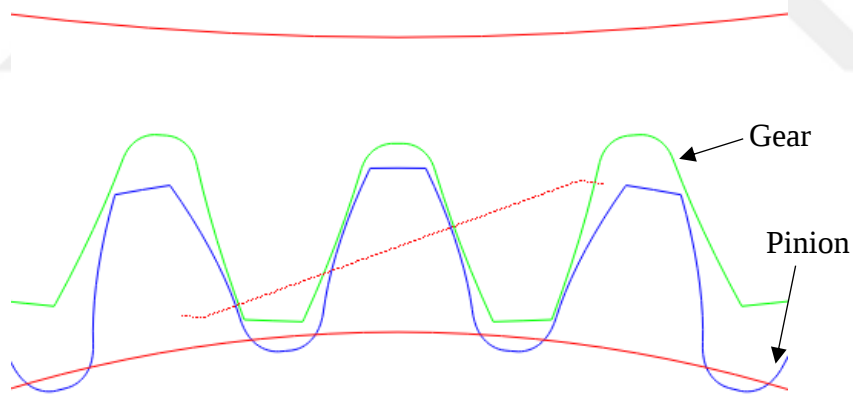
Gear Mesh of Gear Pair of 29 and 49.
